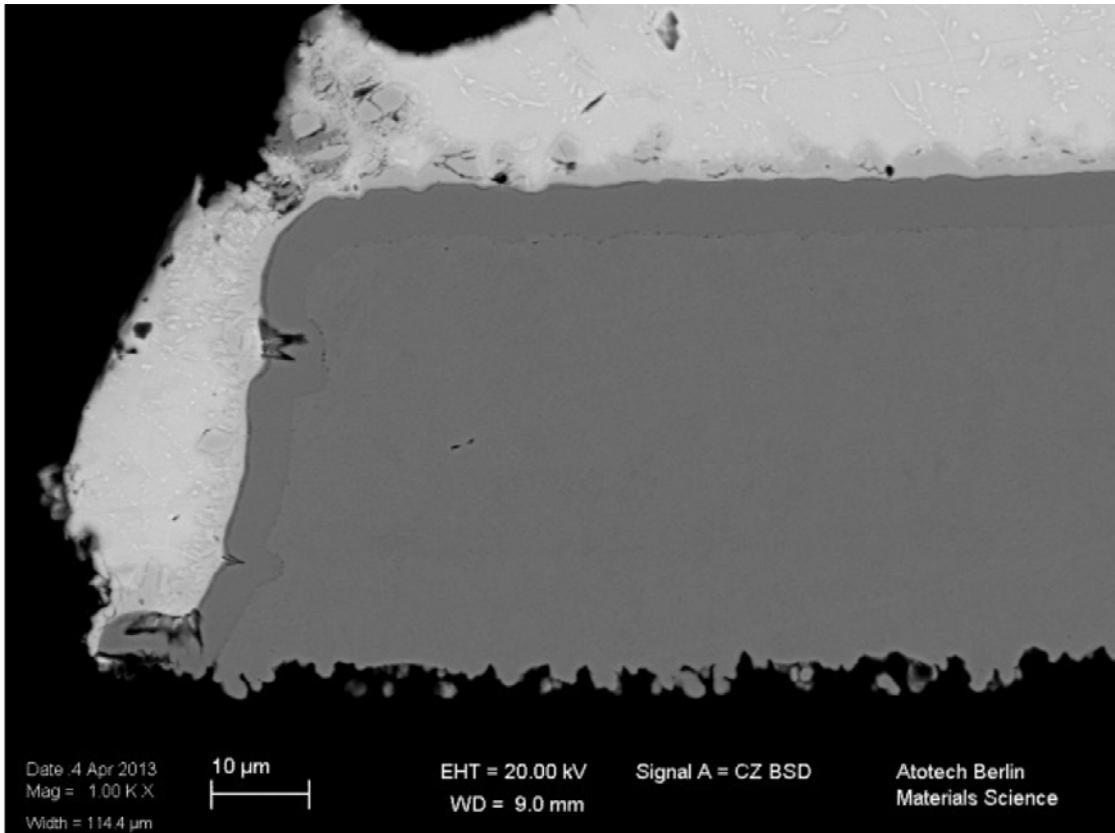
IMC formation at a single corrosion location on a soldered pad.
